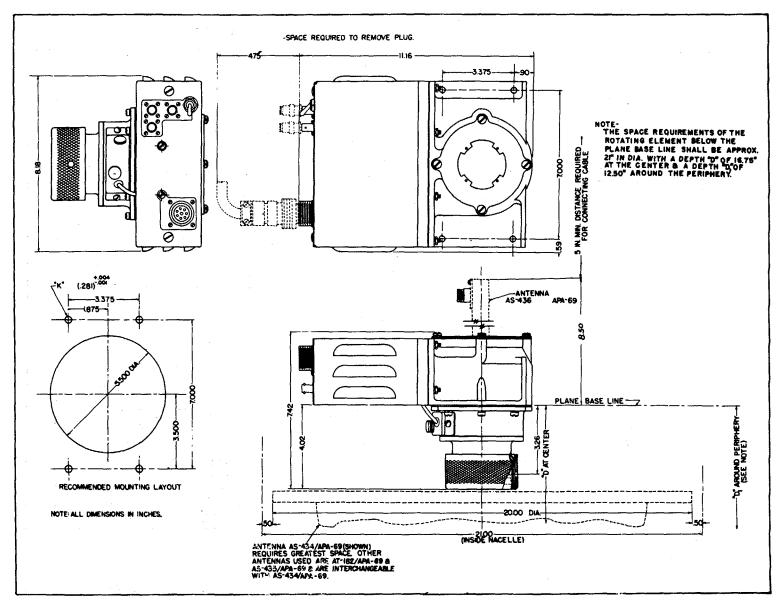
Antenna Drive TG-8/APA-69, Outline and Mounting Dimensions
